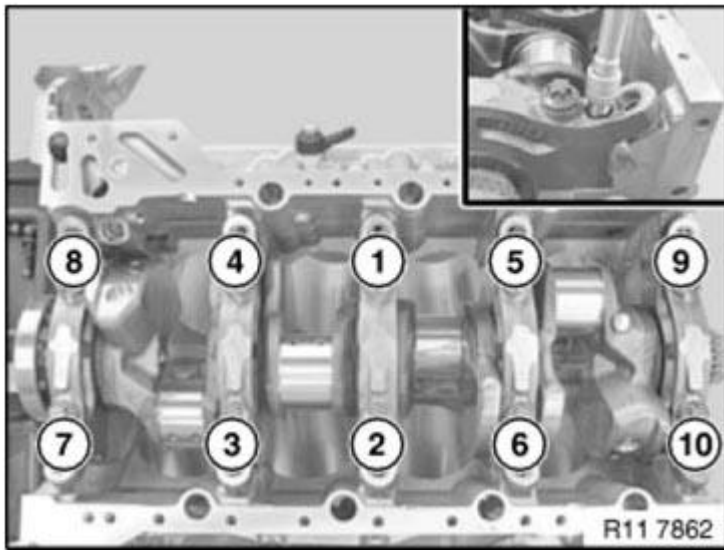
Identifying Collar Bolts (M8) Tightening Sequence
